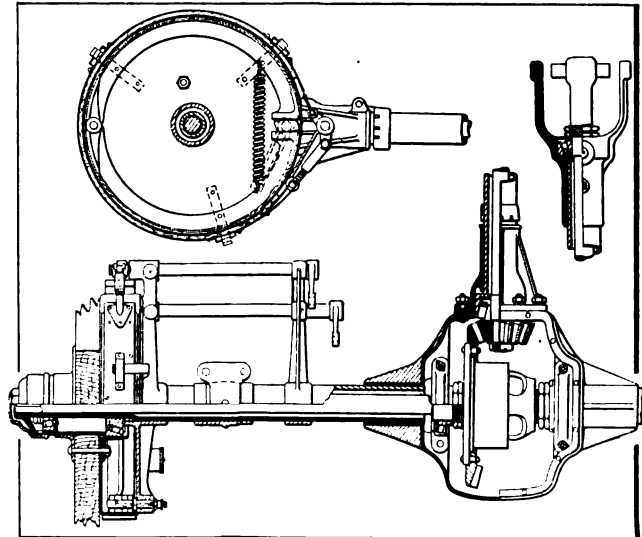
Transverse section through National rear axle assembly, showing details of brake construction and differential
